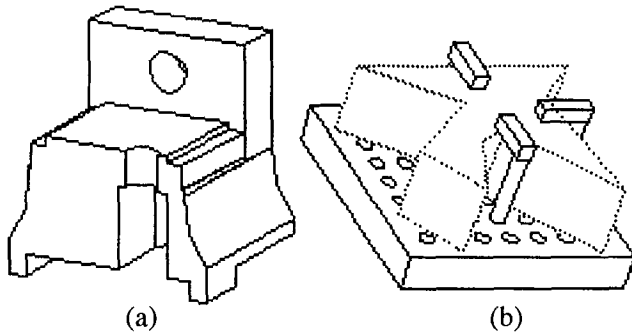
(a) a real-life prismatic design; (b) a machine-clamped prismatic design.
